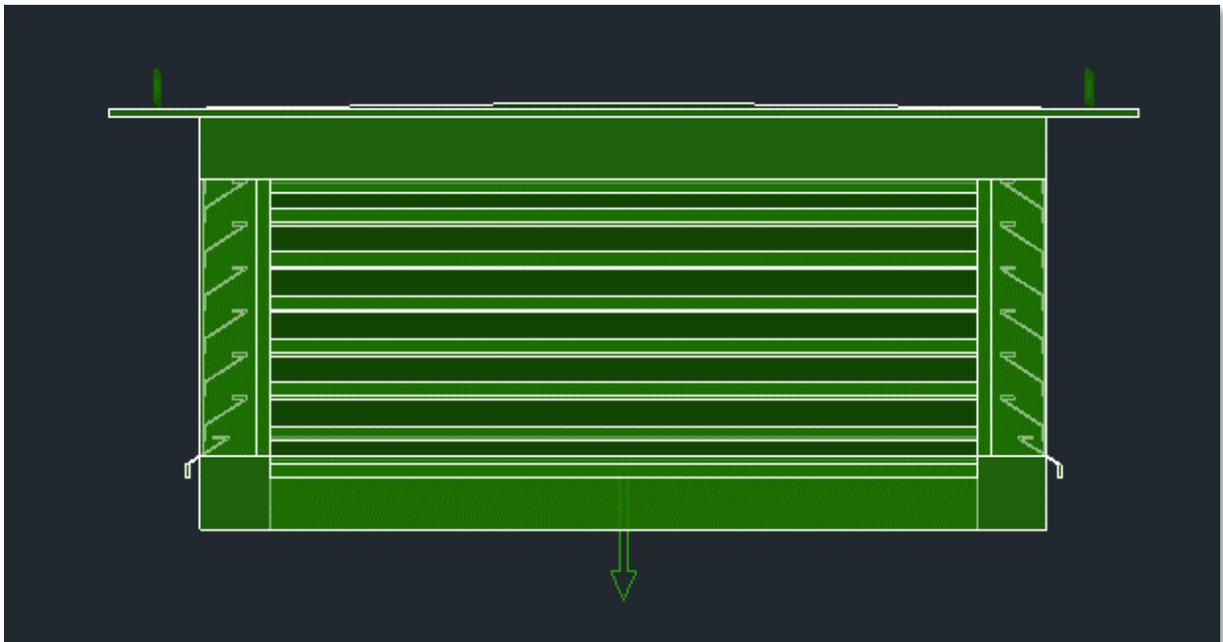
Exhaust roof hood product 3D geometry in AutoCAD drawing
